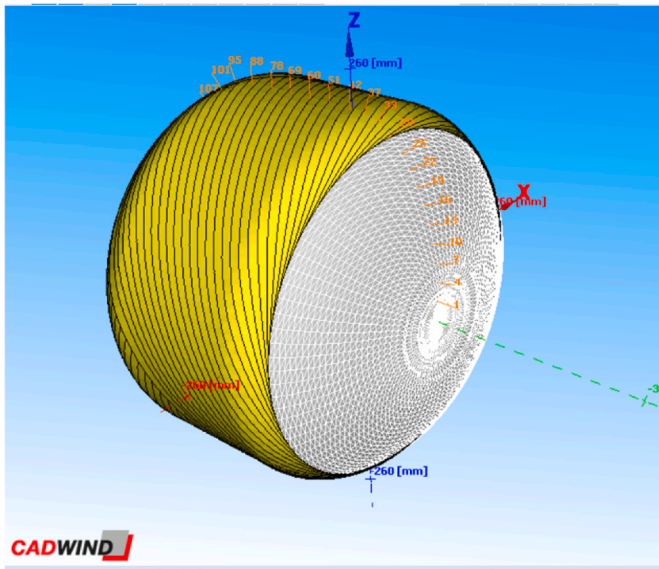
Layer 03 tape-winding at winding angle 65 deg.
